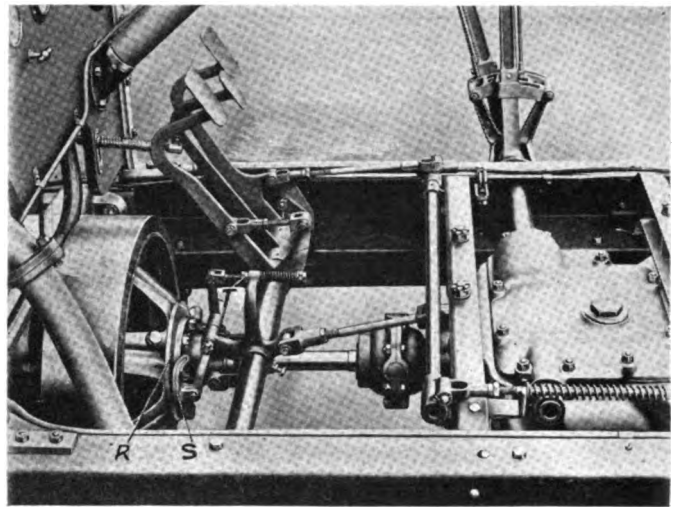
View showing clutch and brake controls, method of mounting gearbox, etc.
